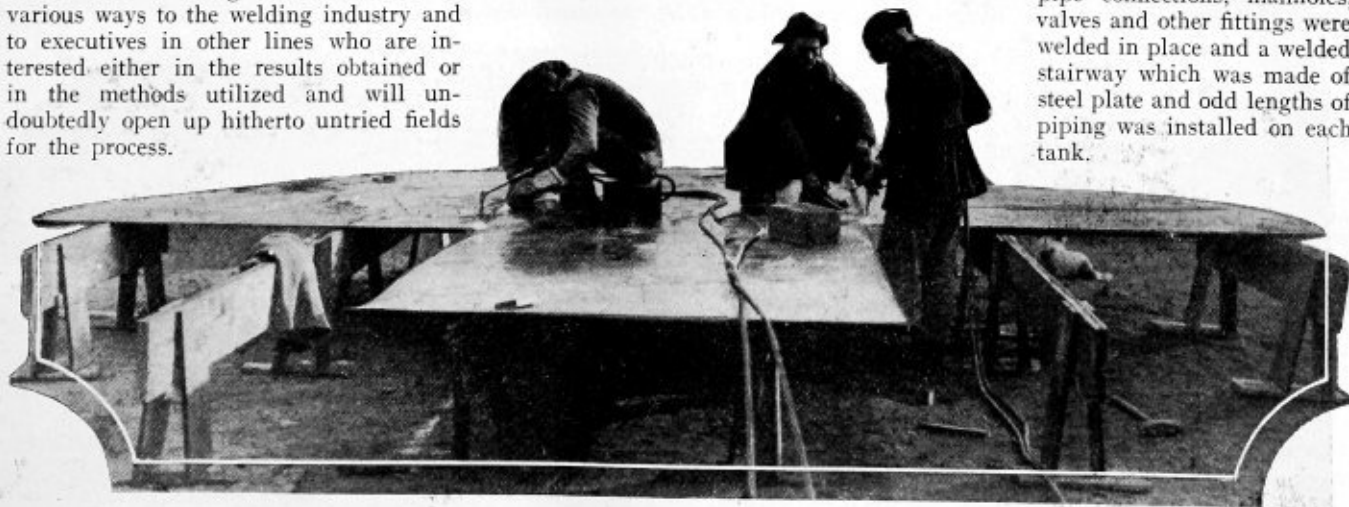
Welding Bottom Plates of Oil Storage Tank
